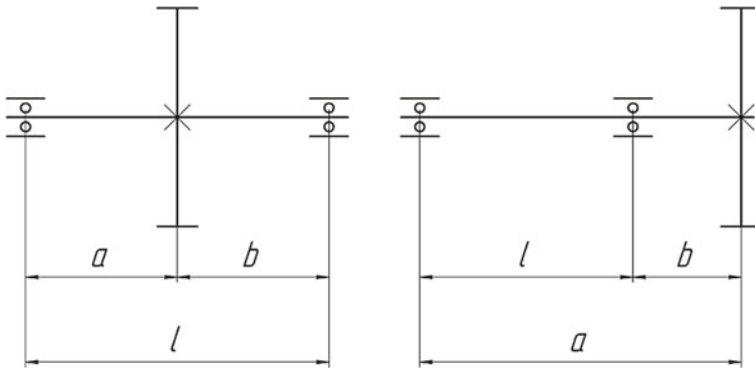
Inter-support (left) and cantilever arrangement of the gear wheel on the shaft
